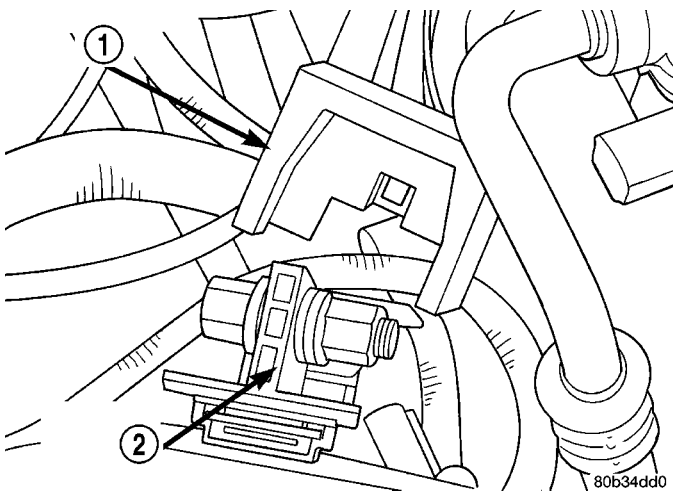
POSITIVE JUMPER START ATTACHMENT
